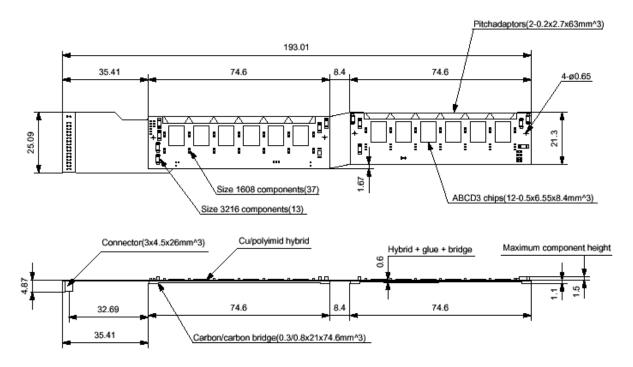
Dimensions (in mm) of the SCT barrel hybrid
